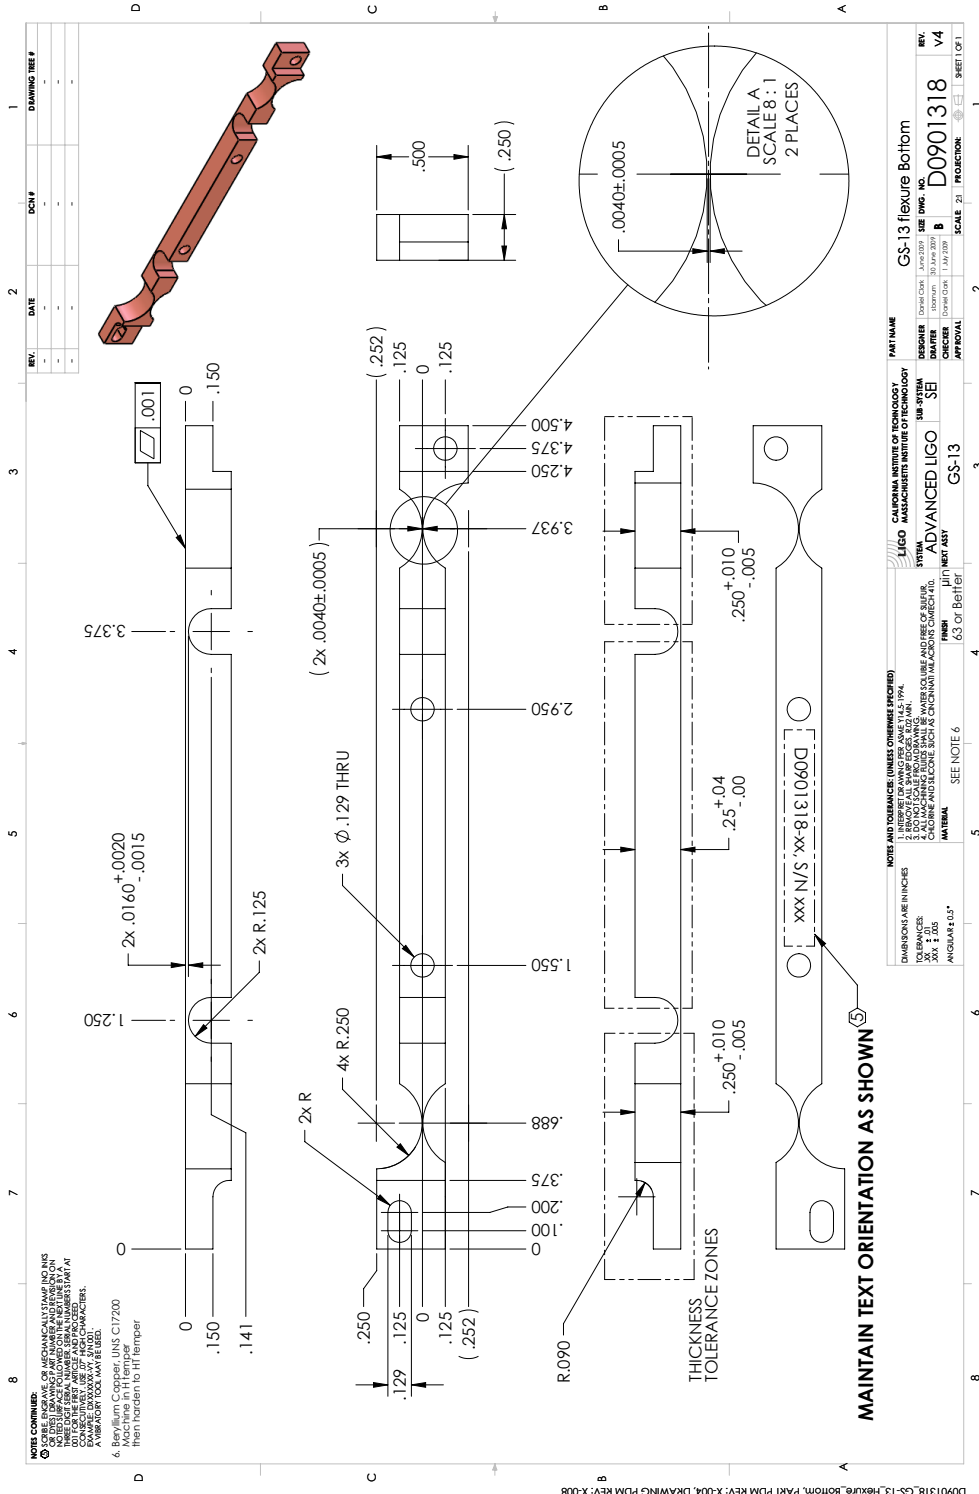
CAD drawings of the BeCu GS-13 replacement lower flexure design.
